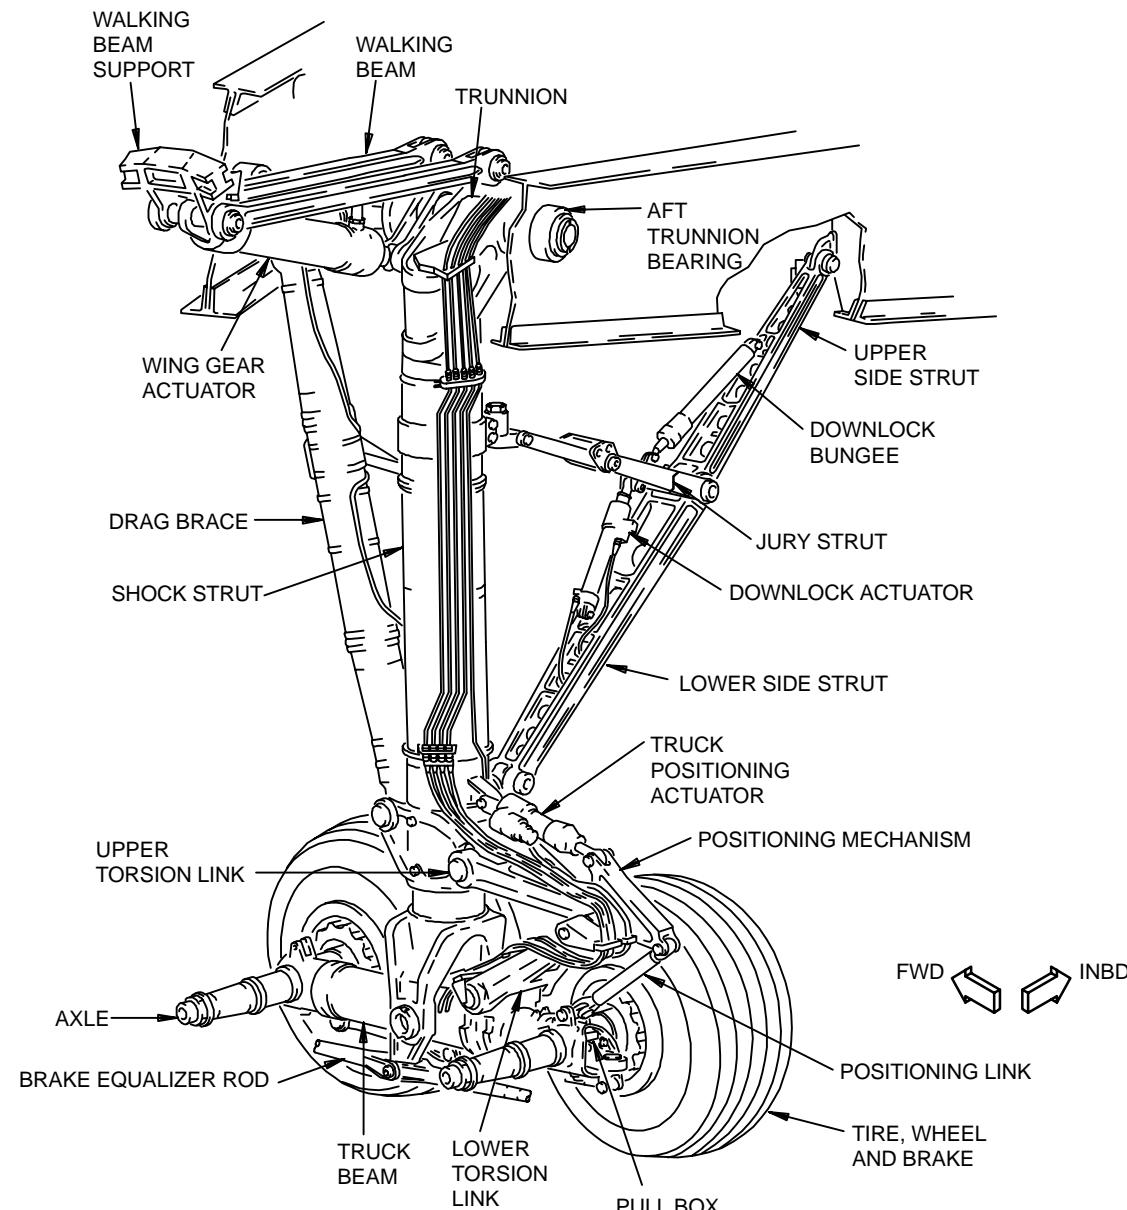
WING GEAR GENERAL COMPONENTS OVERVIEW
